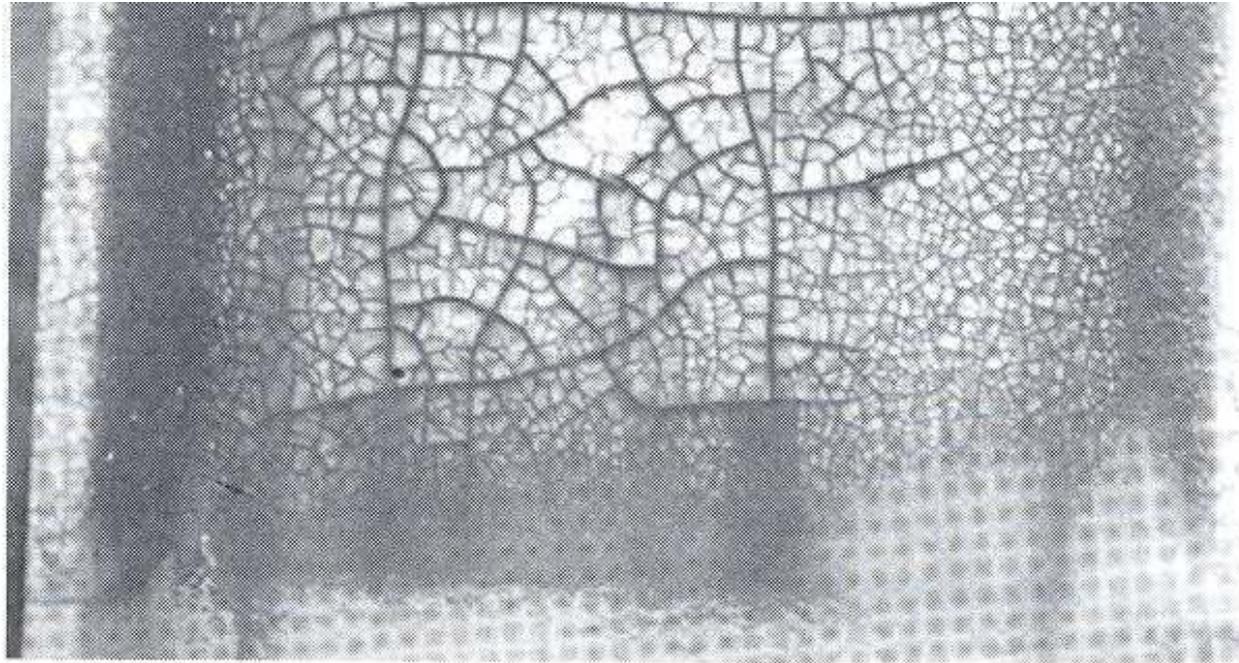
General cracking of a coating, showing larger cracks in heavily coated areas.
